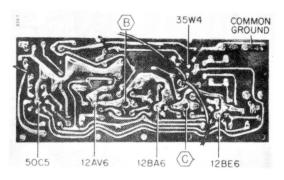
Bottom View of Chassis Showing Alignment Points and Tube Locations.
